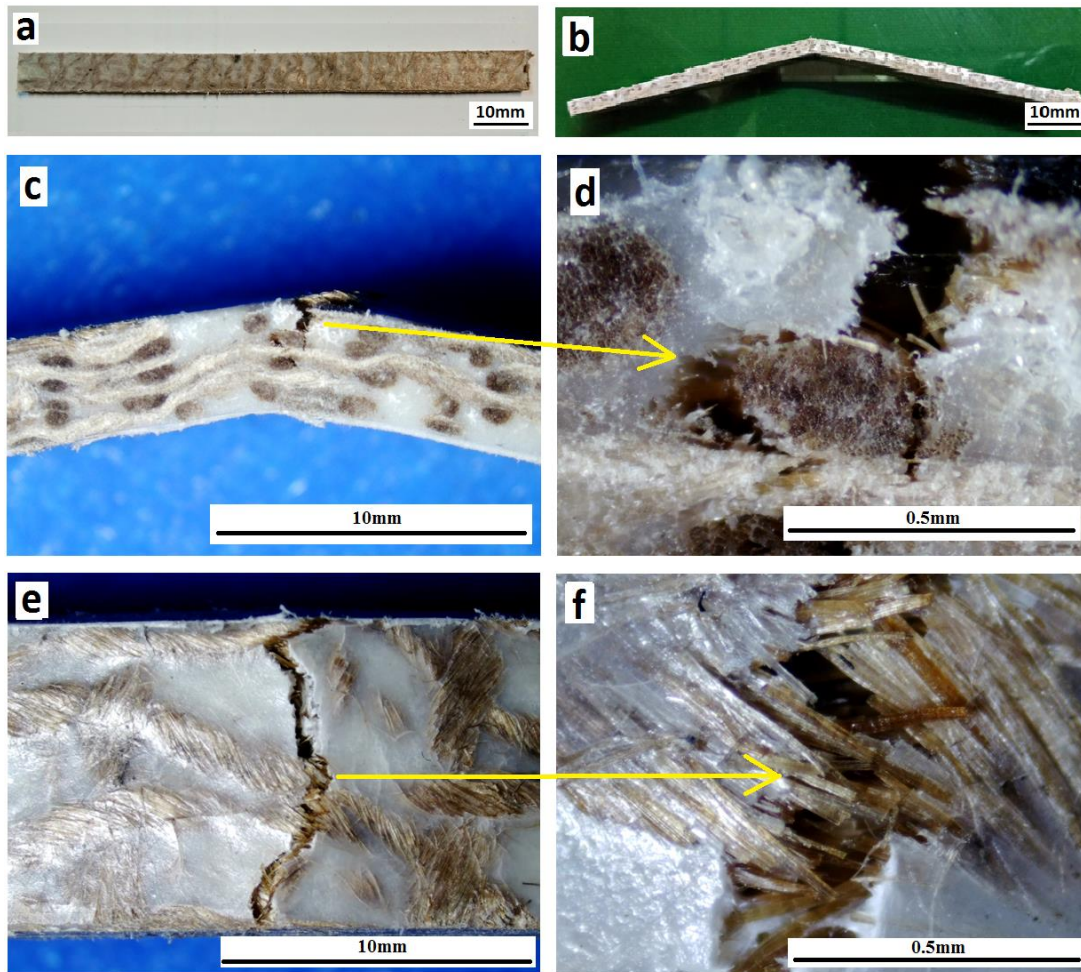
3-point tested samples of non-broken 3D orthogonal commingled specimens (weft direction), (a) 3-point specimen before test, (b) specimen after test, (c) side view at 7x zoom (d) side view at 40x zoom (e) tension side of tested specimen at 7x zoom, (f) tension side at 40x
